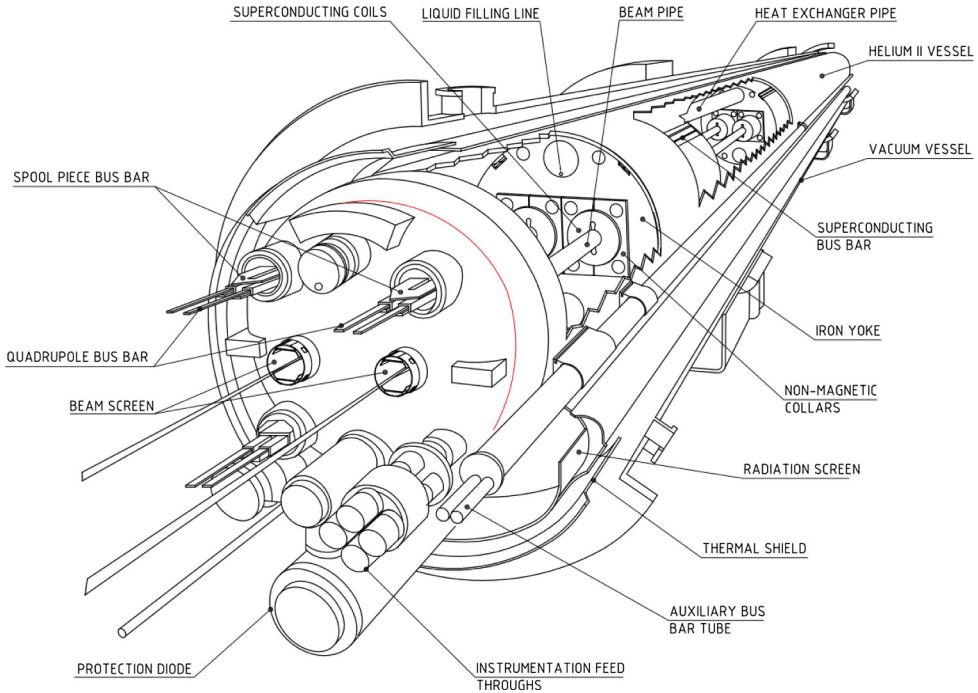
3D view of main dipole magnet cold mass assembly.
